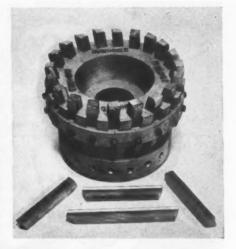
Close-up View of Automatic Indexing Fixture of Colonial Press Shown in Fig. 1
